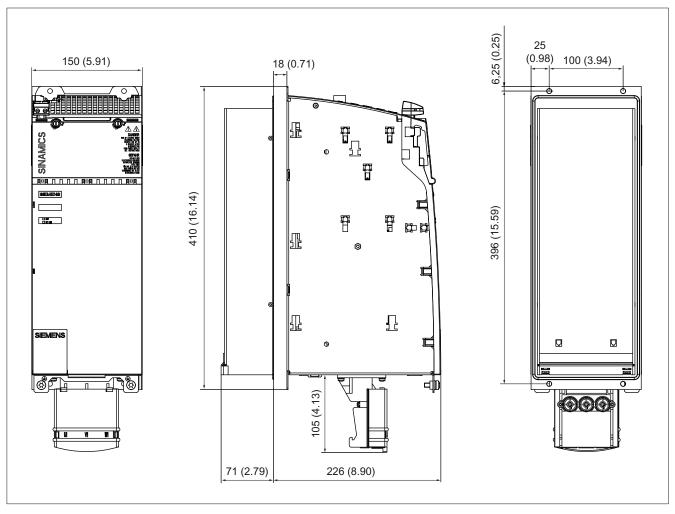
Dimension drawing of 36 kW Smart Line Module with external air cooling, all dimensions in mm and (inches)
